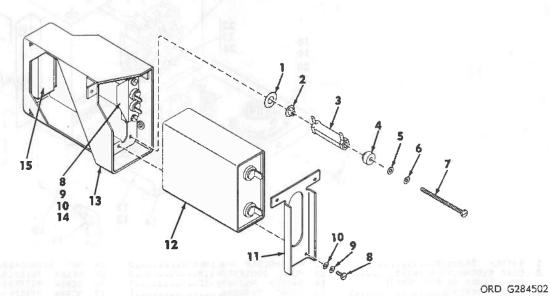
CAPACITOR ASSEMBLY /9138173/-EXPLODED VIEW /SEE FIGURE 87 FOR NEXT HIGHER ASSEMBLY/
